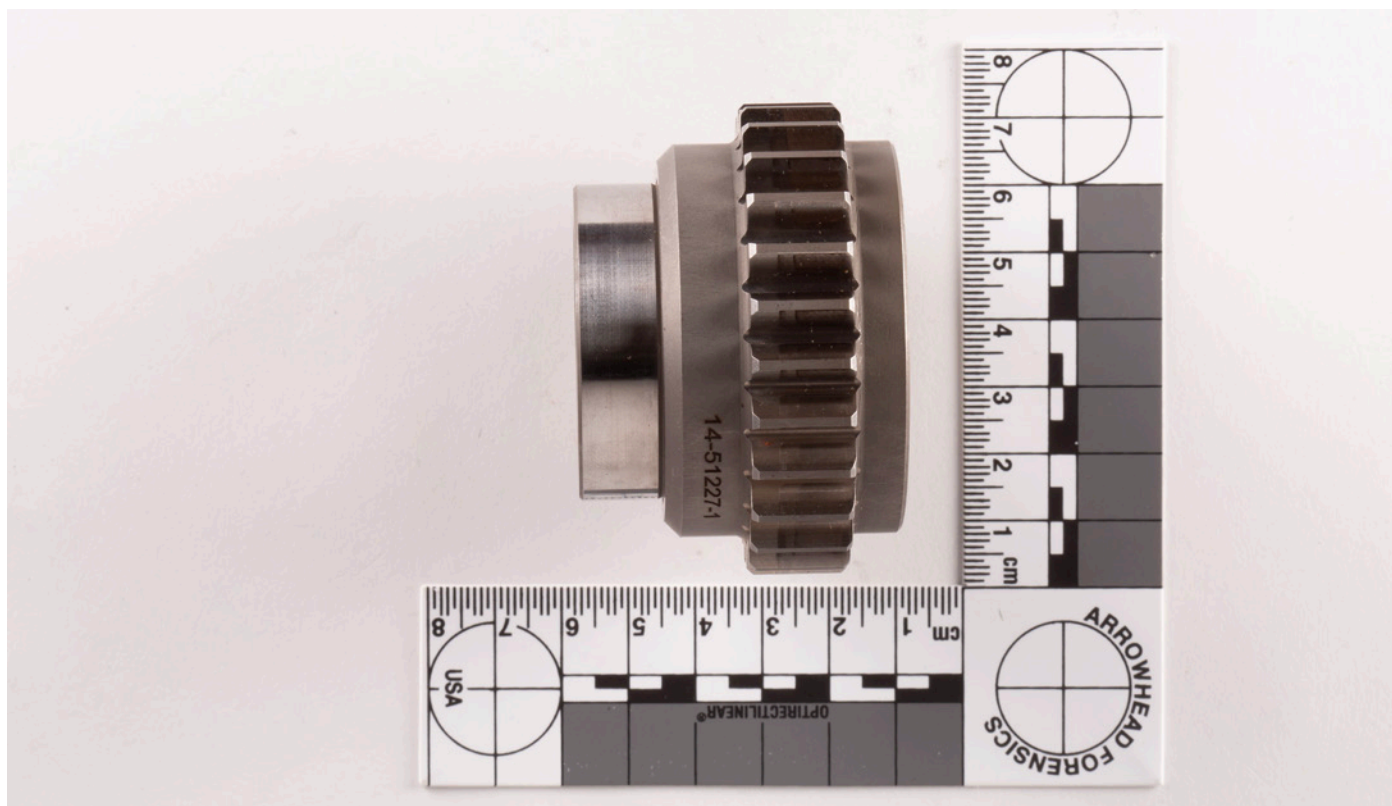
Sprag Clutch Gear (Gear #3) with scale for reference.
